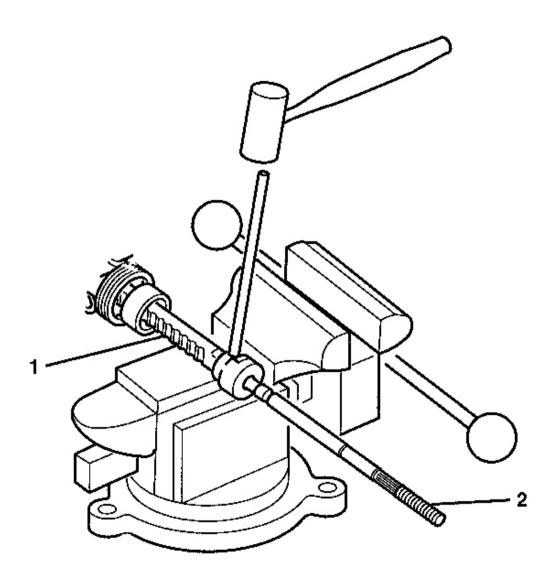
Staking Inner Tie Rod Assembly & Male Rack Courtesy of GENERAL MOTORS CORP.
